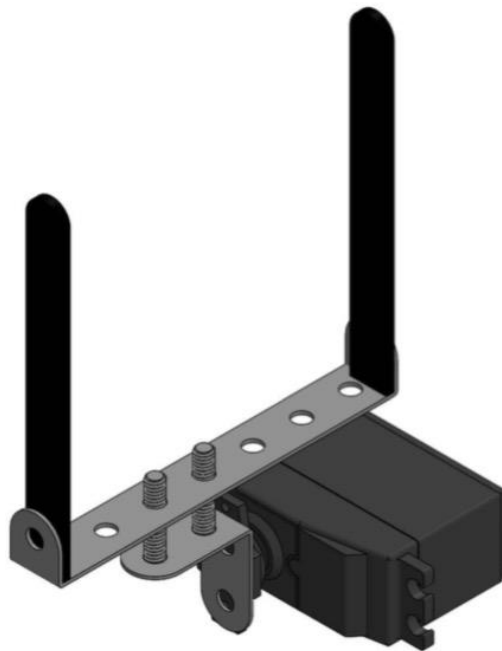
SolidWorks assembly of the robot's wrench mechanism.
